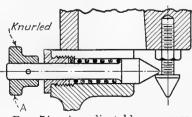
An adjustable gear-case cover lock. If the door is pushed shut, it is automatically latched, whereas pulling out the knurled knob A disengages the latch.
